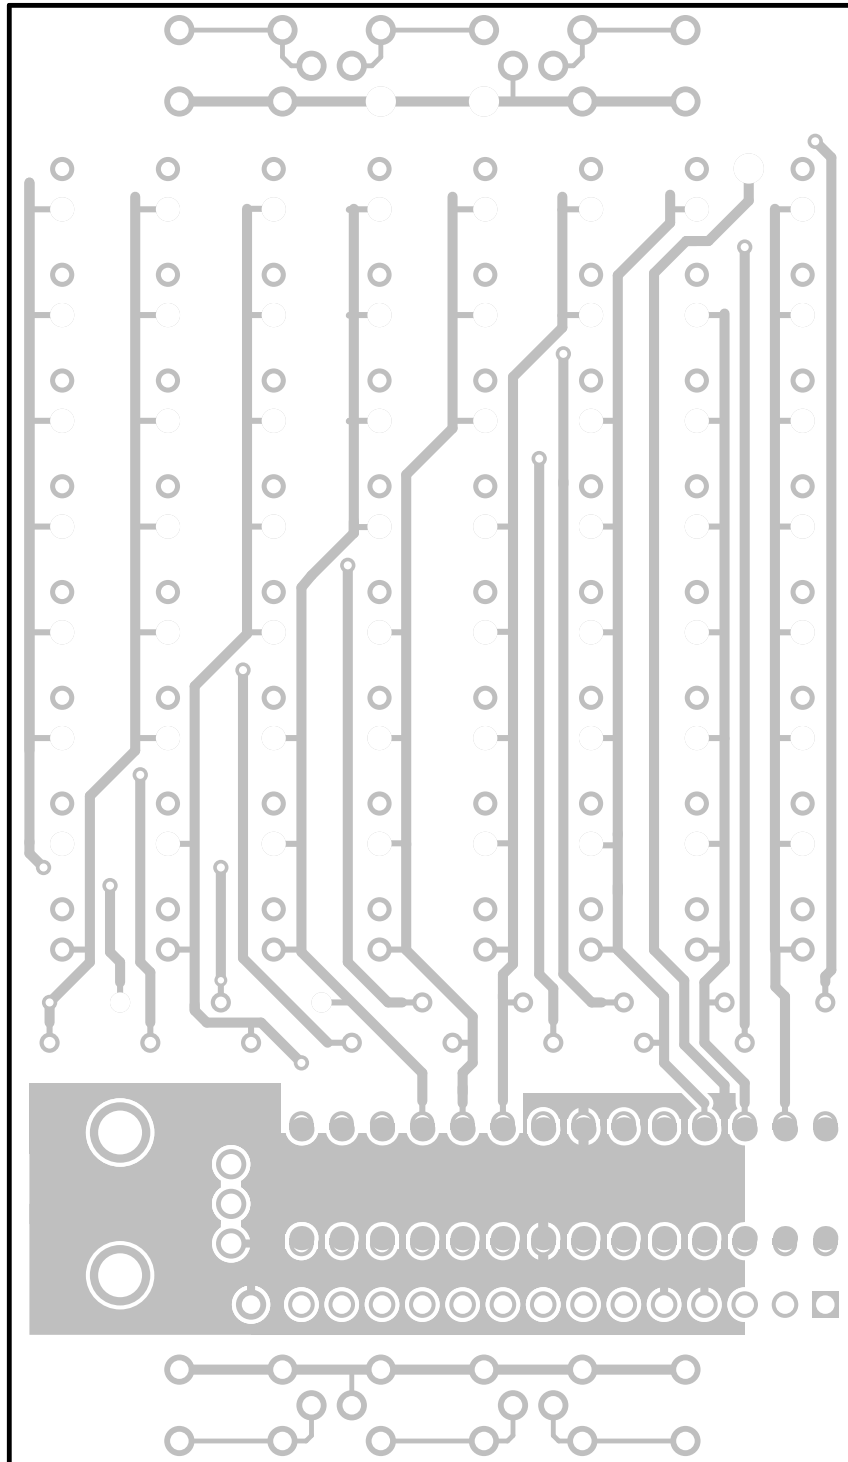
PICO1TR-LED-L Bottom Side Assembly Drawing (Rev 1)
